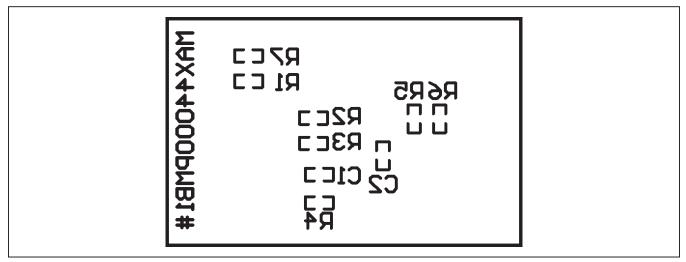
MAX44000PMB11 Peripheral Module Component Placement Guide—Solder Side
